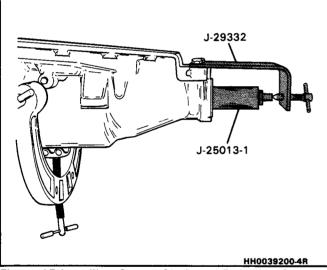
Installing Output Shaft and Rear Unit Support Fixture
